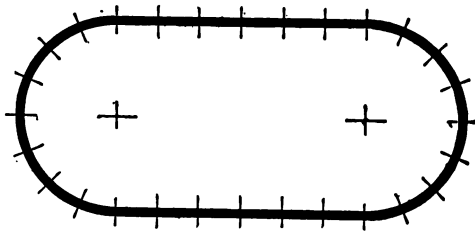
Showing the relative position of rivet holes in the large and small ends of joints in oblong pipe.
